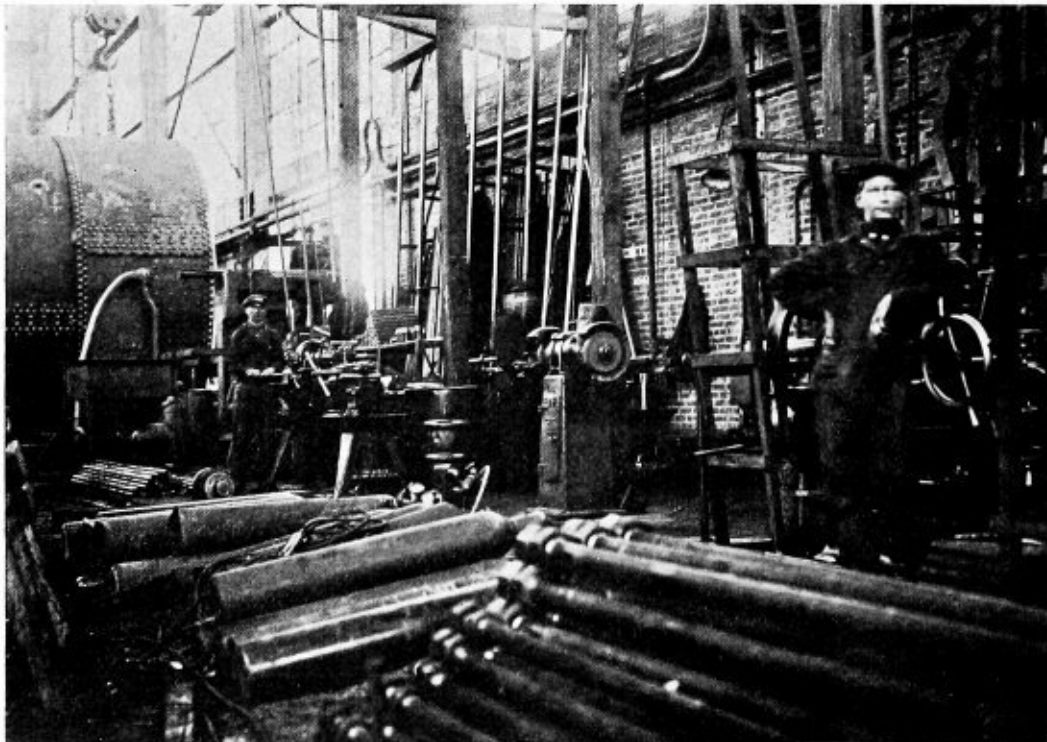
Machine Tool Equipment and Six-Foot Gap Hydraulic Bull Riveter
